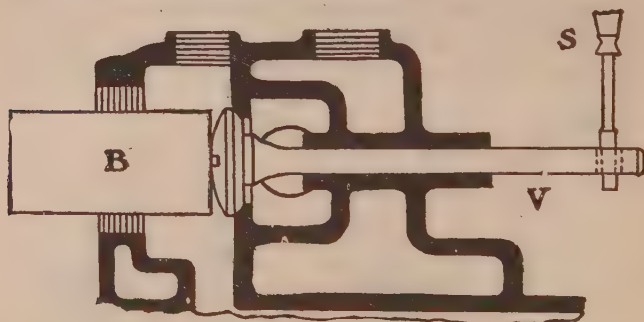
Method of grinding valves in horizontal cylinders. A block of steel B is held against the head of the valve V and the latter rotated on its seat by means of a screw driver blade S inserted in the slot in the stem, the face having been previously trued by a truing tool. In cases where the stem of the valve has no slot, a pair of gas pliers can be used to grip it, being careful in so doing not to mutilate the threads thereon.
